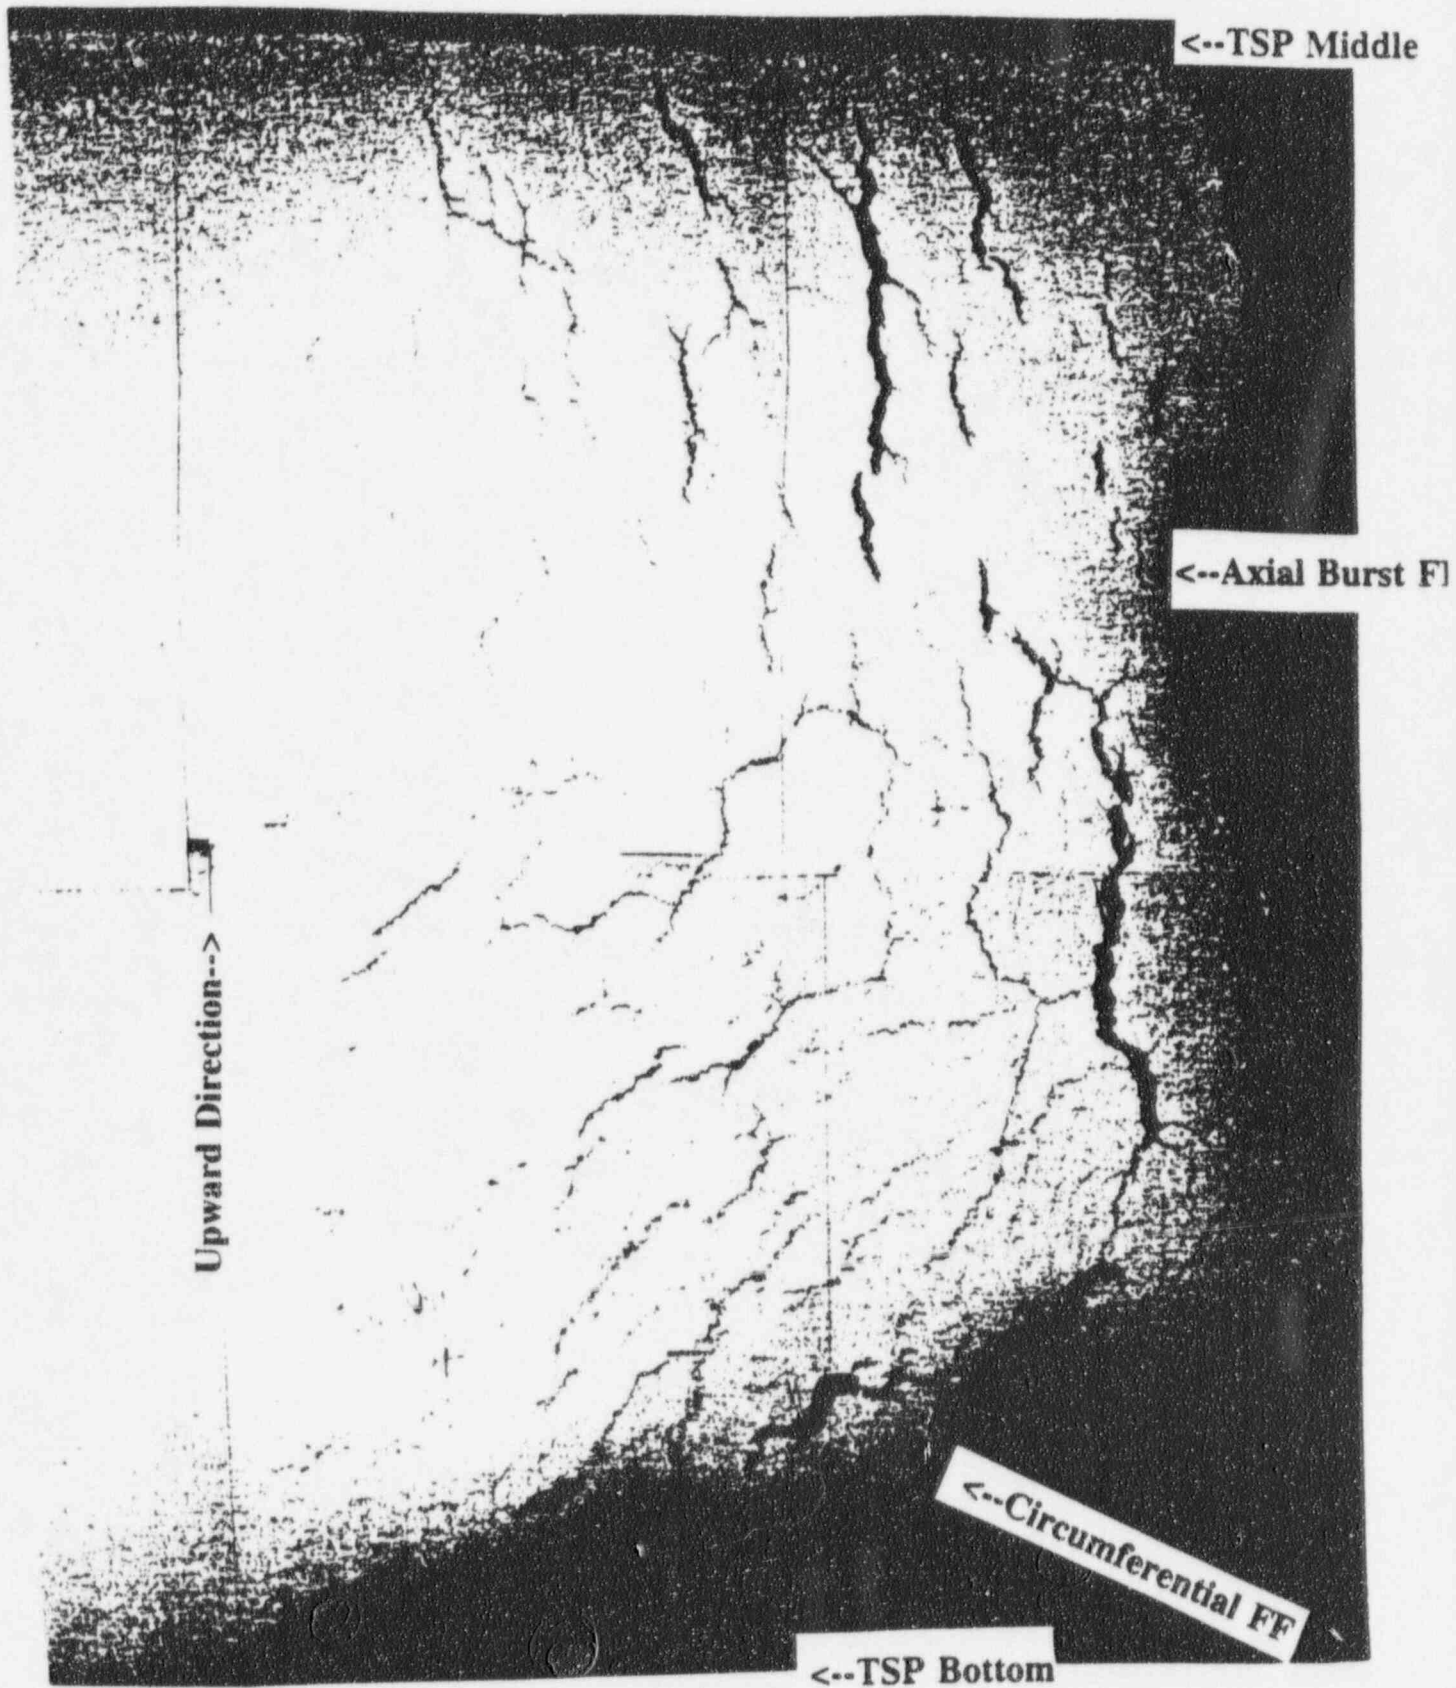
OD radial metallography showing intergranular cellular corrosion (ICC) present along with the more dominant axial intergranular stress corrosion cracking (IGSCC) in the middle of the first tube support plate (TSP1) of Tube R11C61 and along with the more dominant circumferential cracking near the bottom of the TSP crevice region. 16X Mag. 10% depth
